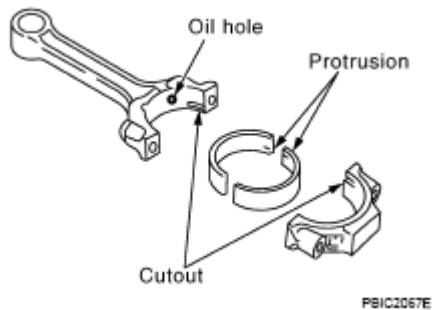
Aligning Connecting Rod Bearing Stopper Protrusion With Connecting Rods
